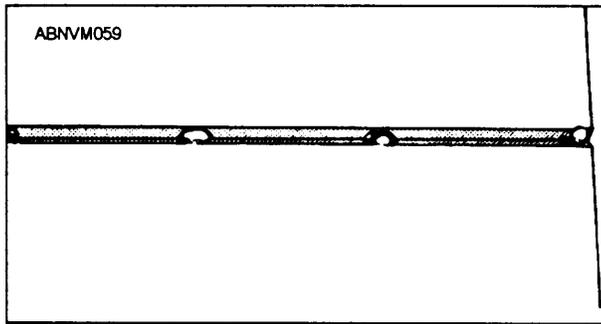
Plates tack-welded and aligned for GMA welding.
